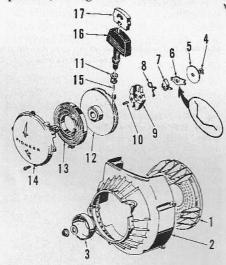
Exploded view of rewind starter. Friction spring (6) should be installed as shown.
